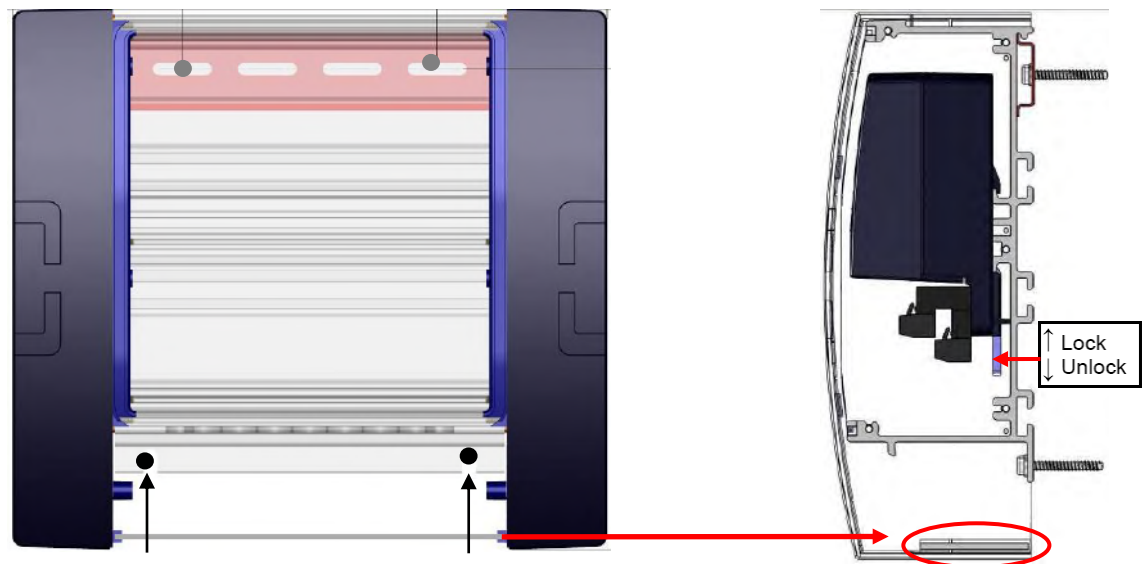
Mounting the DIN rail on the wall with washers on screw detail
